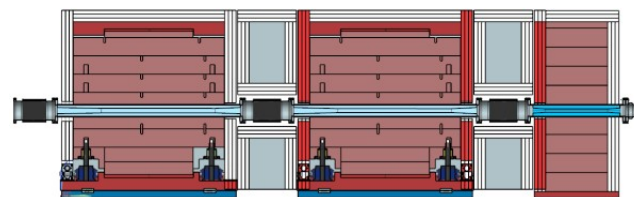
Traditional collimator design candidate elevation cross section. Beam travel is left to right.
